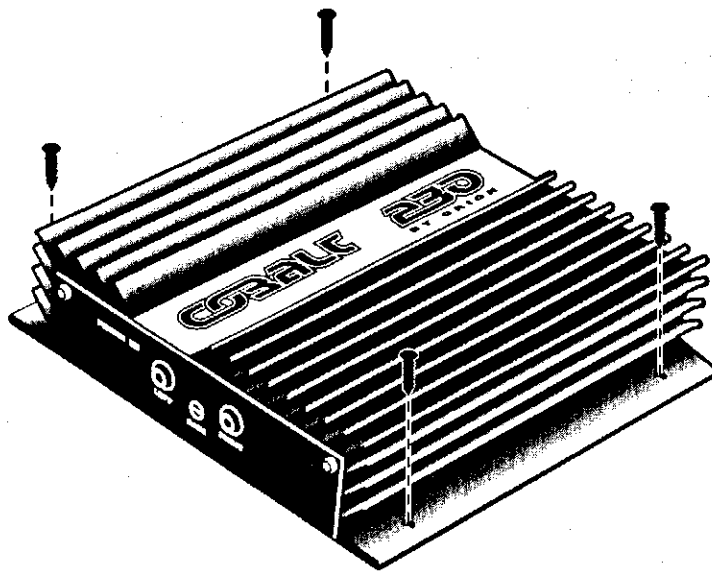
Mounting hole locations on a COBALT 230 amplifier.
